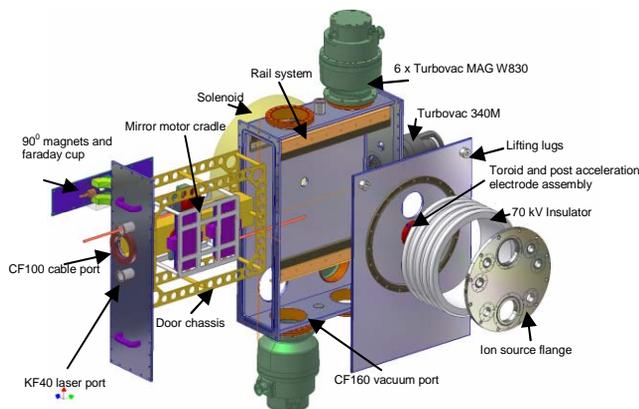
Exploded view of the beam profile measurement system inside the ion source vessel.
